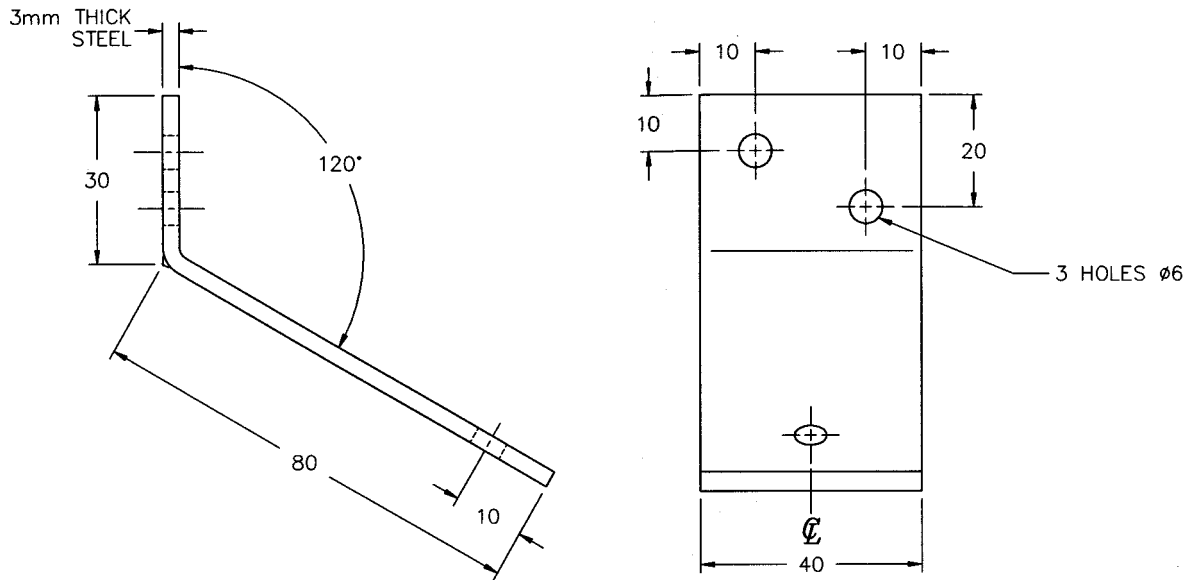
Replacement Bracket, Blackout Headlamp Mounting
